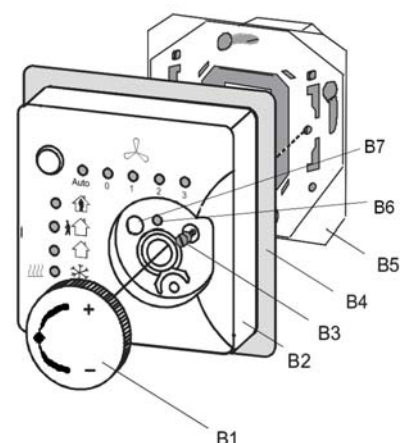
Mounting the Fan-Coil Unit Operator Panel
